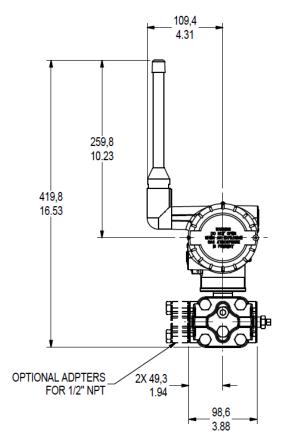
Dual Head, typical mounting dimensions for STAW740 (4 dBi antenna shown)
